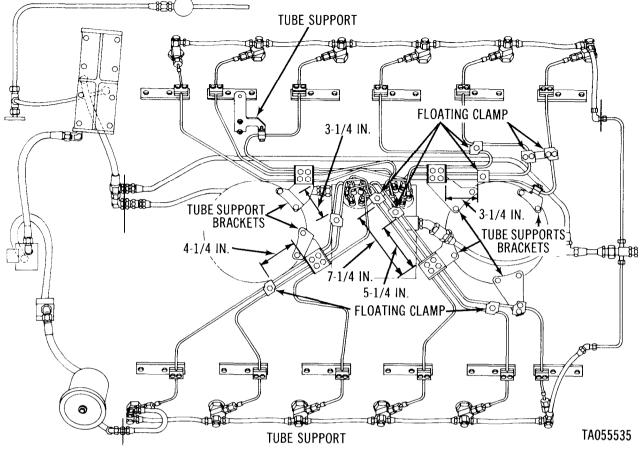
Location of fuel injector tube clamps, model AVDS-1790-2DR engine
